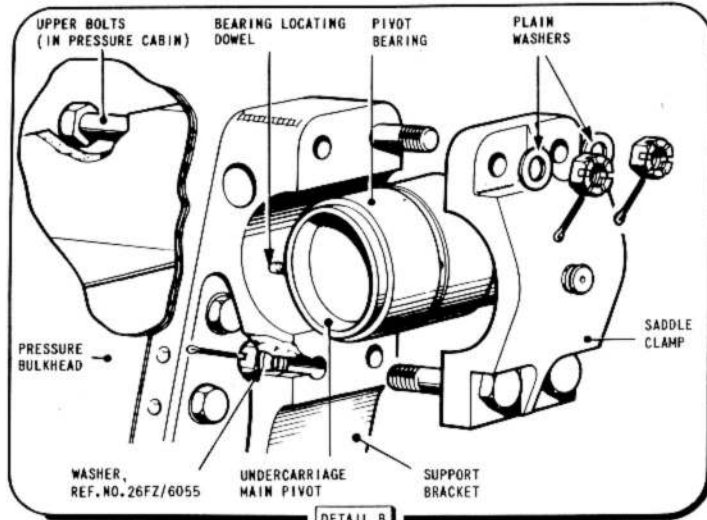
UNDERCARRIAGE REMOVAL AND ASSEMBLY (2)
